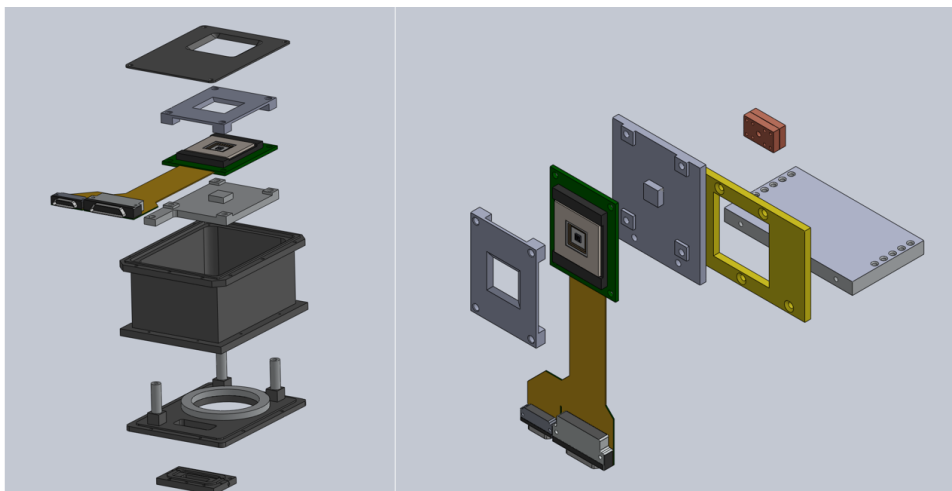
The image above shows the detector PCB and mechanical mount design for optical testing (left) and radiation testing (right).
